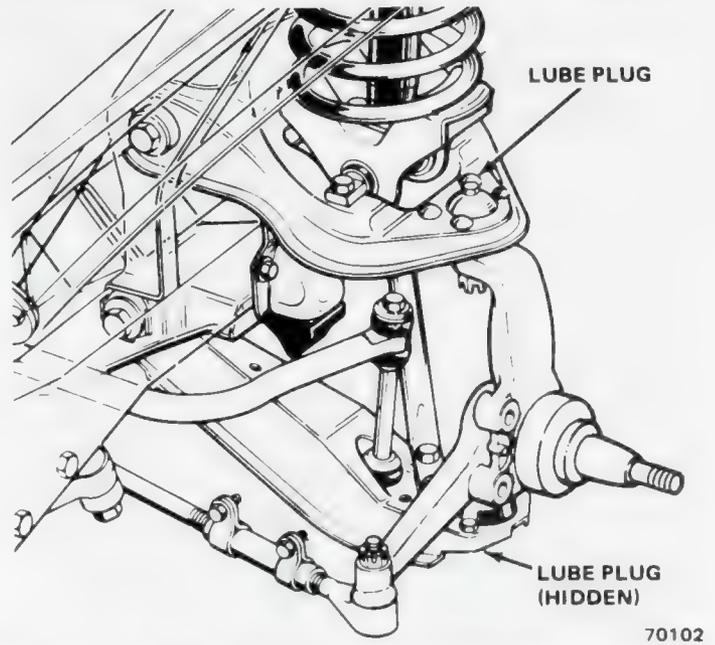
Ball Joint Lube Plugs—Gremlin-Concord-AMX-Matador
